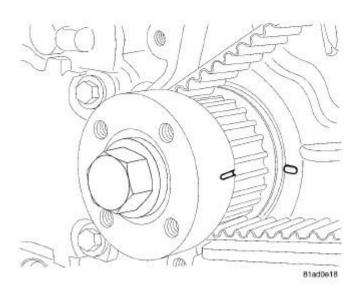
CRANKSHAFT TIMING MARK Courtesy of CHRYSLER LLC
